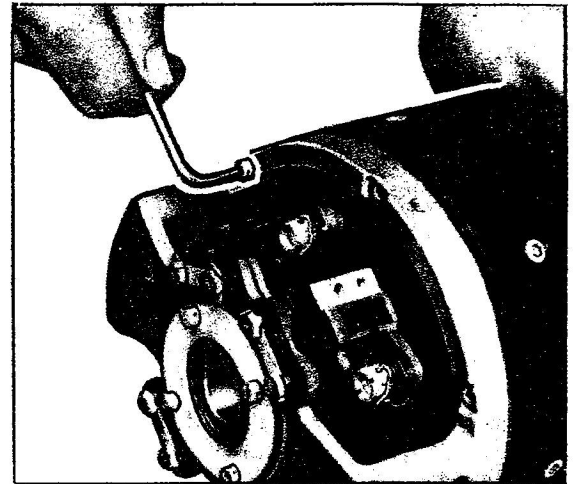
Removal of Front Head to Yoke Mounting Screws
